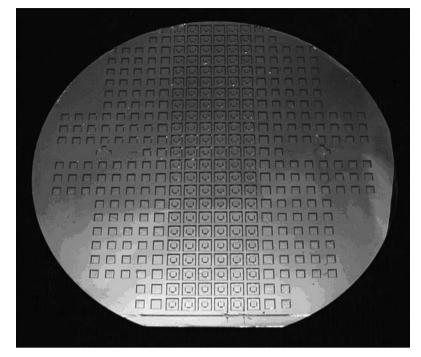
A silicon wafer with pressure sensor chips: back-side view.
